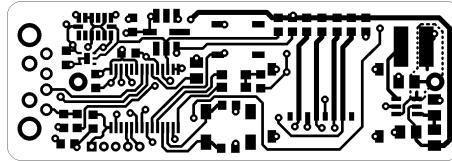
First μPINPoint prototype PCB artwork top layer (actual size).
